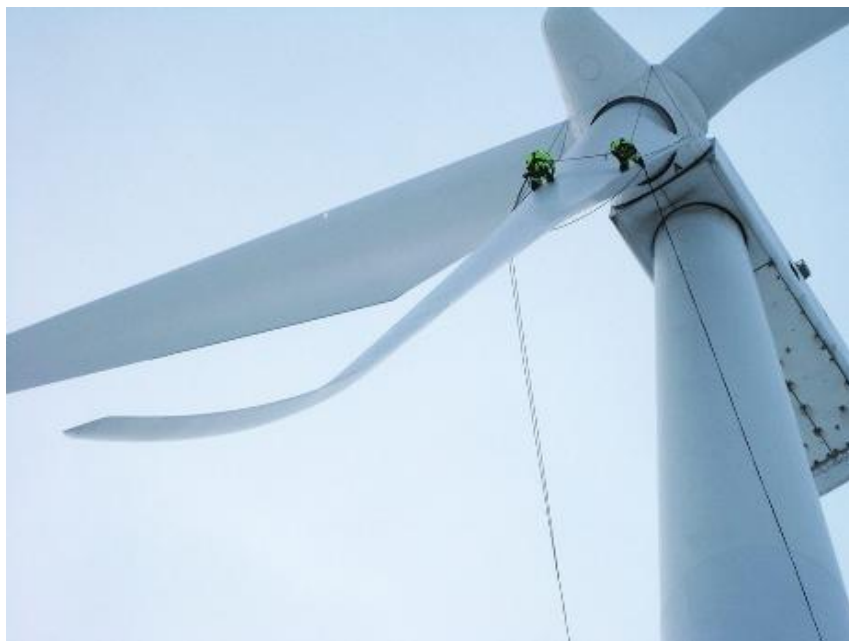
Wind turbine technicians carrying out blade inspection, courtesy of Mistras Group.
